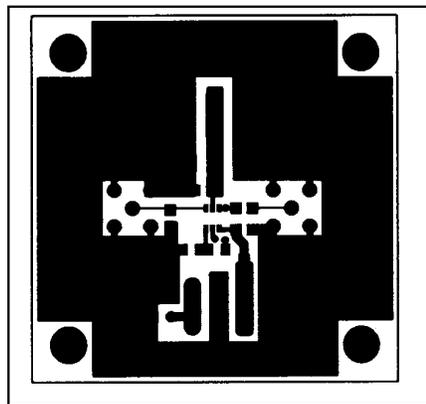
SOT23 High-Speed EV Board Layout—Component Side
